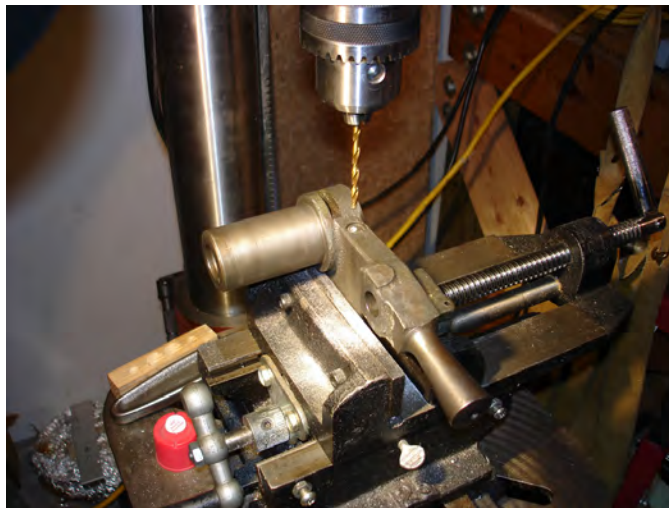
Drilling a hole to remove the plug in the reverse gear casting.
